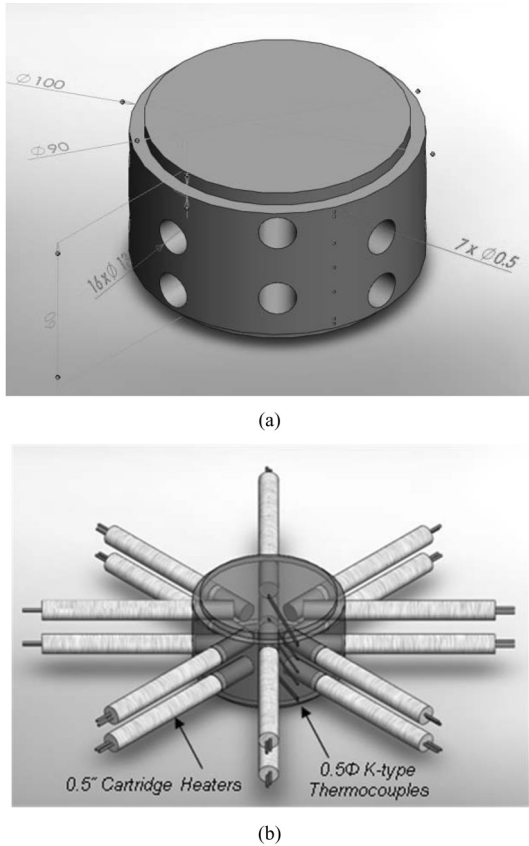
Assemblies of the heat flux gauge: (a) fabrication of test block, (b) total assembly with 16 cartridge heaters and 9 thermocouples.
